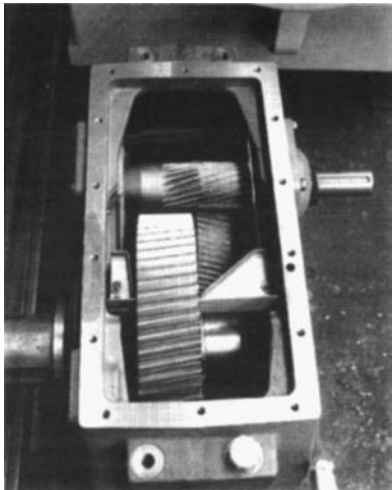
Parallel-shaft gearbox (Hau, 1996). Reproduced by permission of Springer Verlag GmbH
